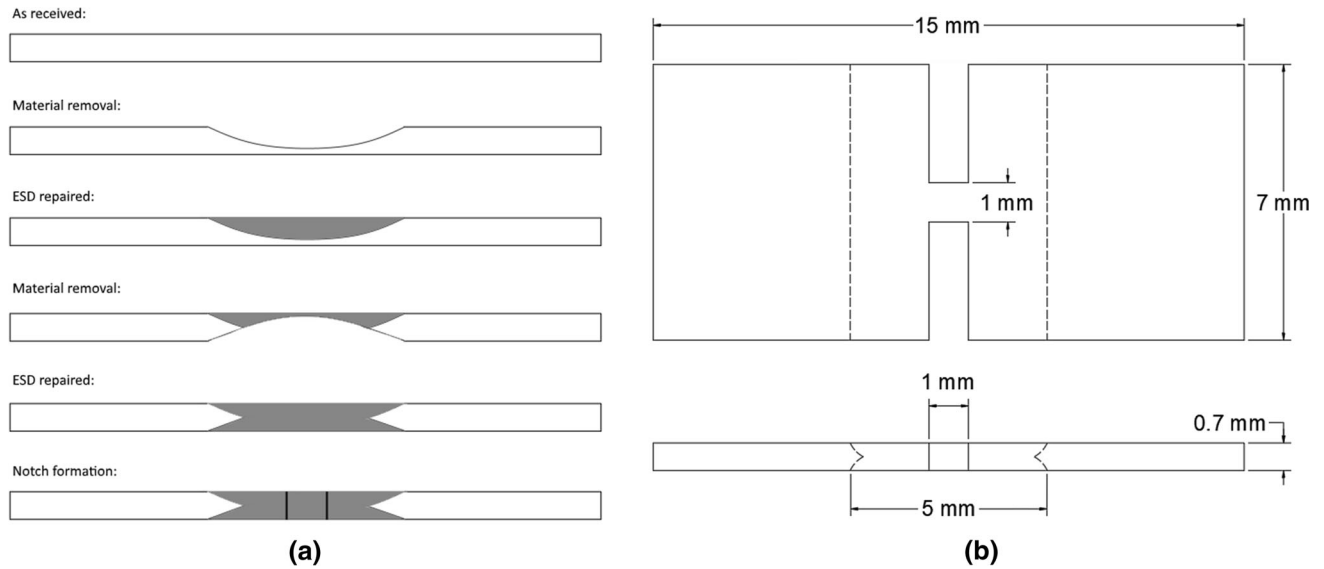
Schematic of (a) tensile specimen fabrication process with the double U-joint repair and (b) specimen dimensions.
